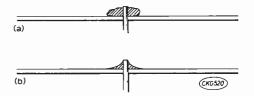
(a) A 'dry' joint, showing the blob of solder due to insufficient heat or dirty surfaces.
